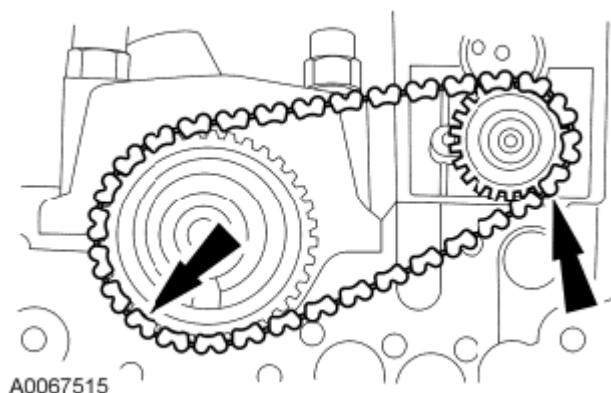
Locating Balance Shaft Chain And Crankshaft Sprocket
